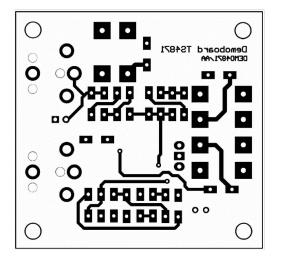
SO8 and MiniSO8 demoboard bottom solder layer
